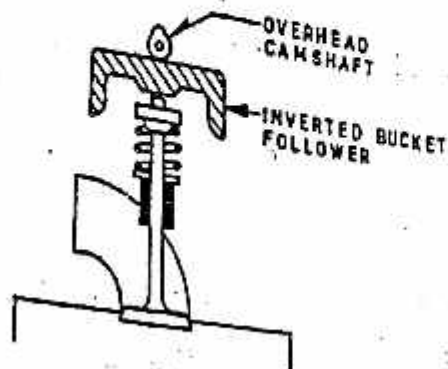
Overhead camshaft-operated mechanism with inverted bucket type follower (Single row valves).
